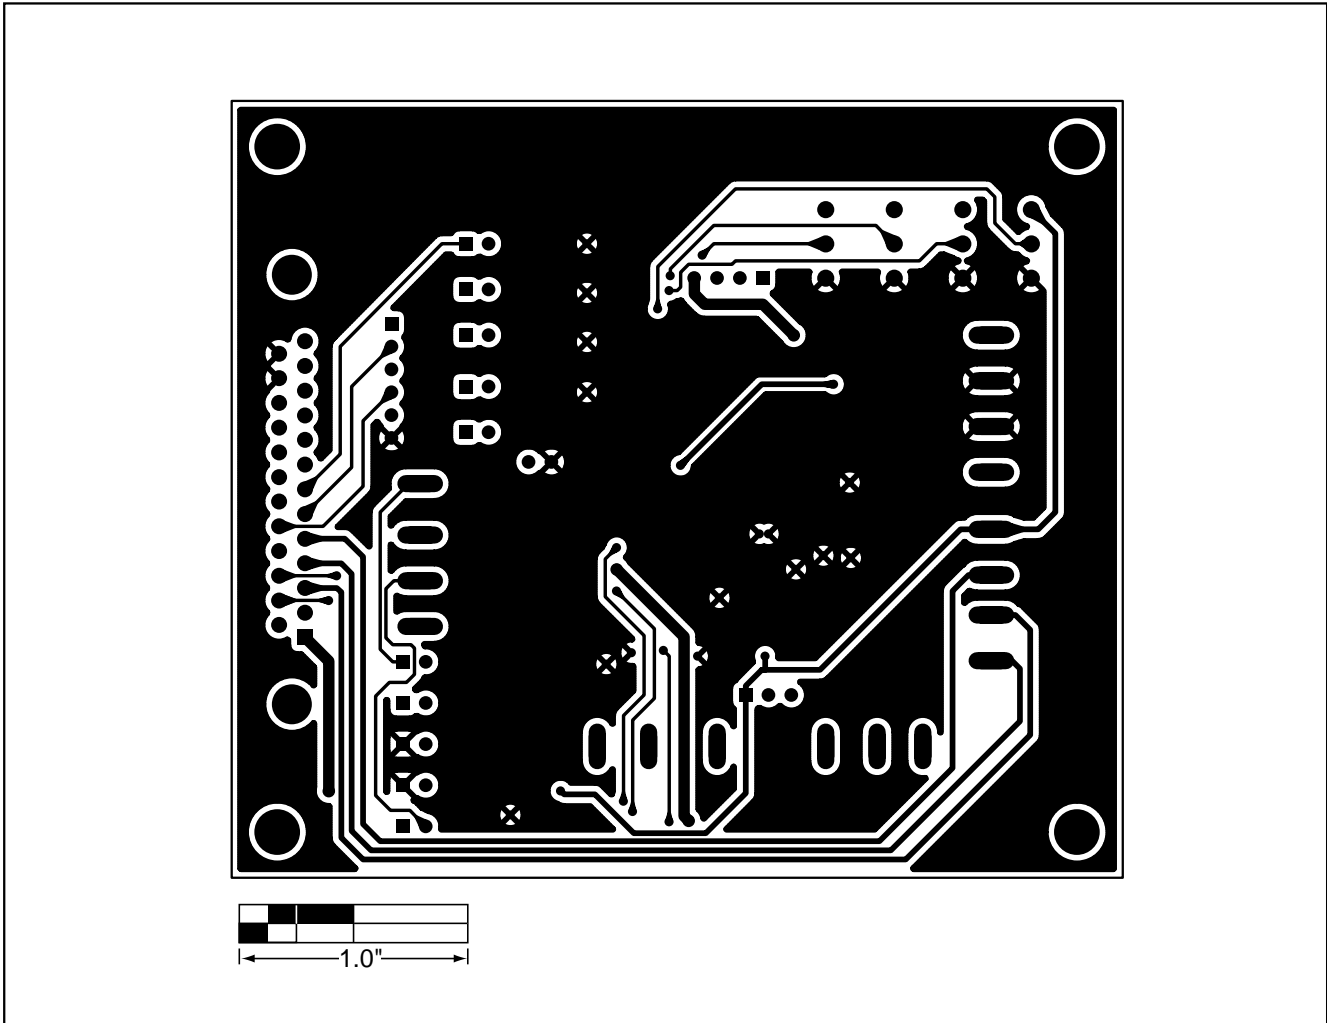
MAX769 EV Kit PC Board Layout—Solder Side
